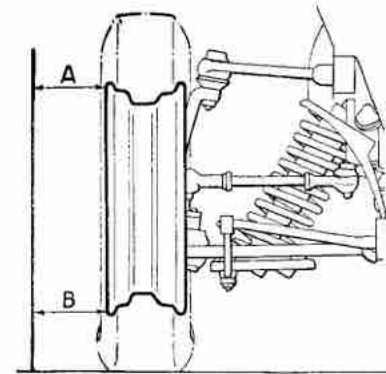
Front wheel camber with car fully loaded: $B = A$.
